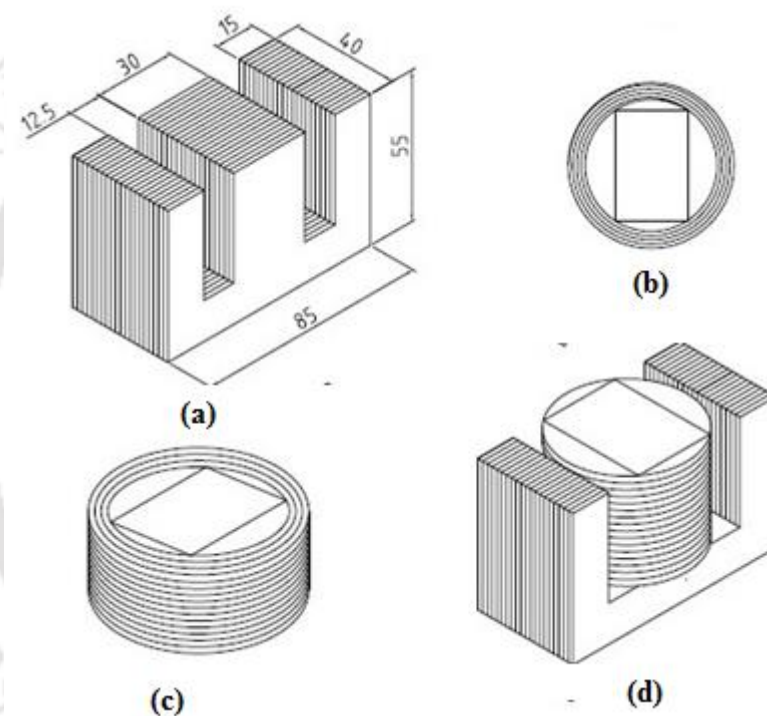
Electromagnet (a) core composed of laminations (b) coil wrapped in core (top view) (c) coil wrapped in core (isometric view) and (d) the complete assembly. All dimensions are in mm.
